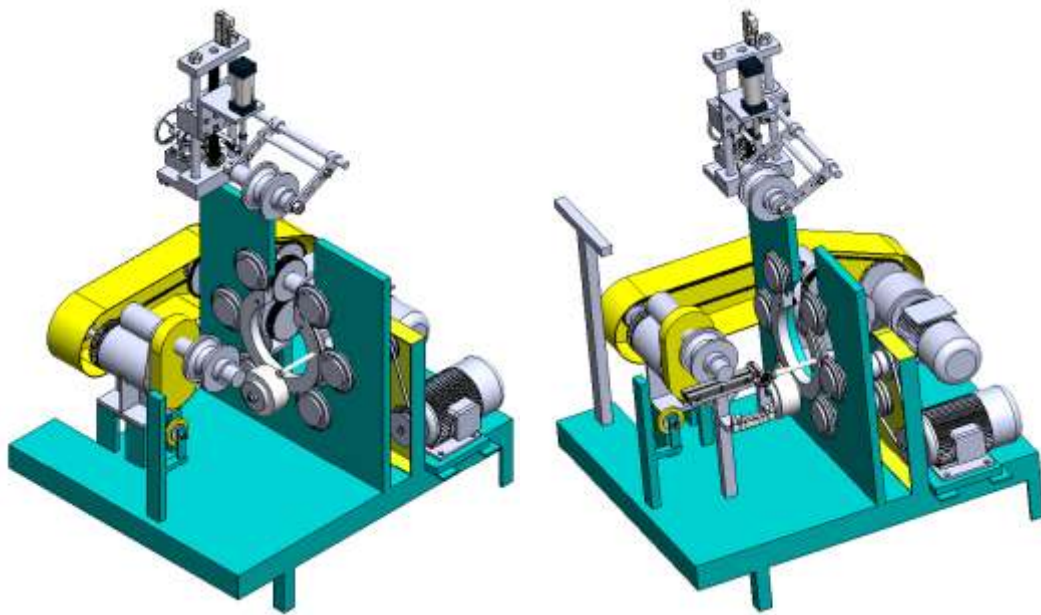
Model before and after designing PE film holding and cutting mechanism
